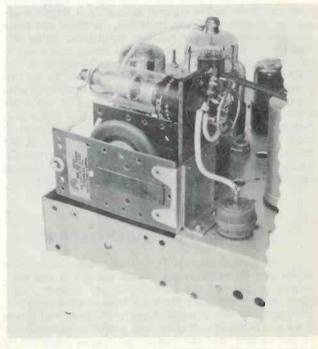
Mounting Detail of HV Rectifier and Horizontal Transformer.
